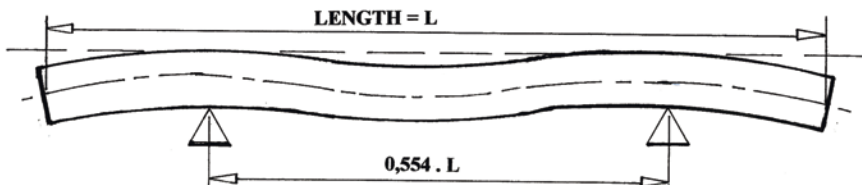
Length bars have often been employed to calibrate machine tools
